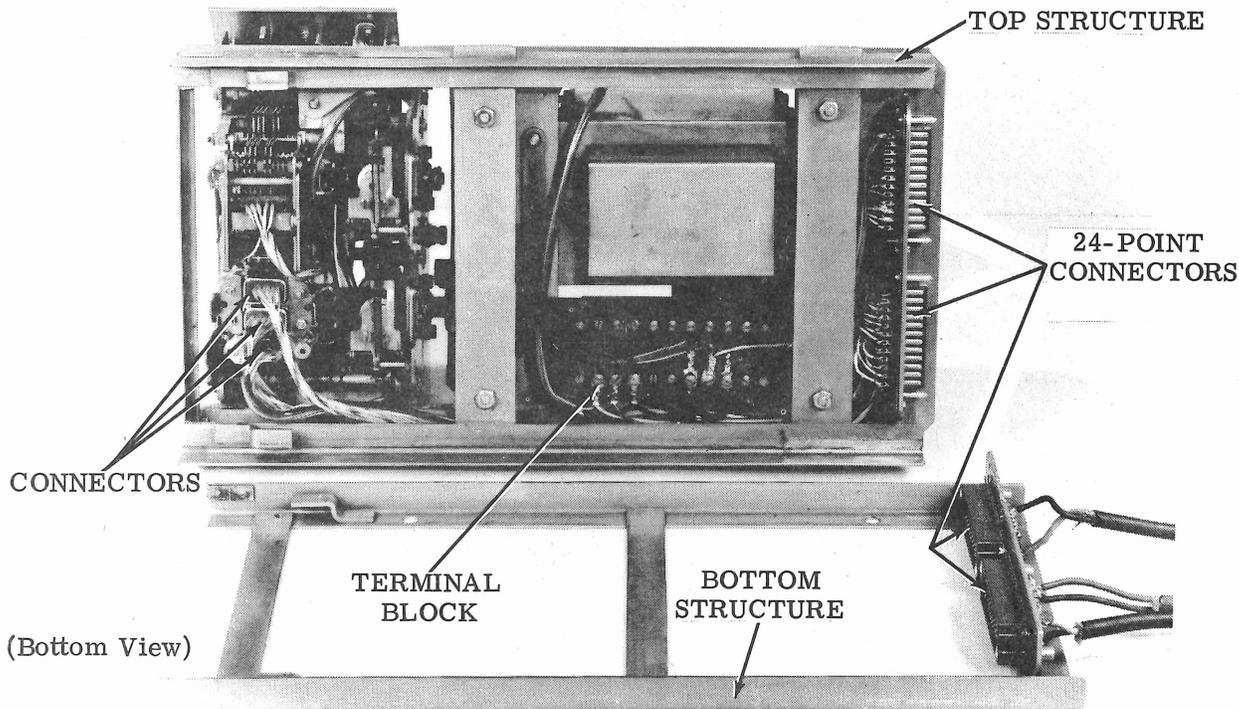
Multicontact Single Mounting Transmitter Distributor Base (Transmitter Distributor and Motor Unit in Place)
